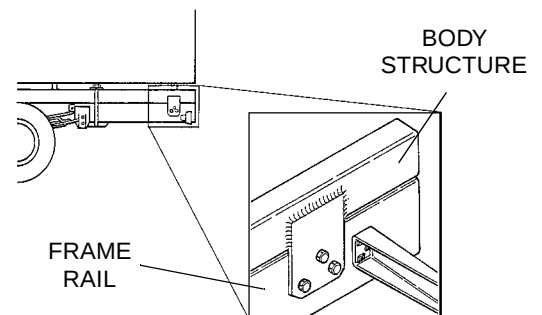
Example of Fishplate Bracket at Rear End of Body, used with U-Bolts.
